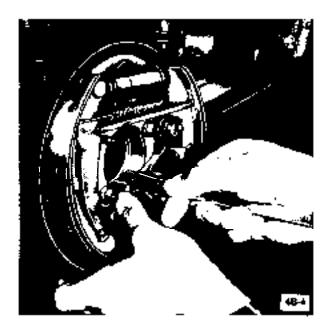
B-4 Measuring for Axle Shaft Bearing Depth
